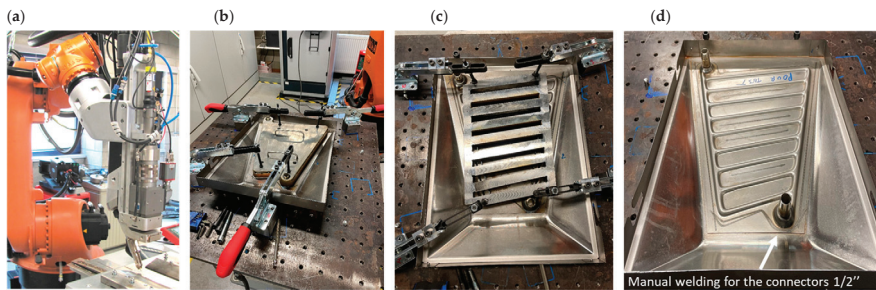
Laser welding setup: (a) laser head mounted on a robot, (b) clamped tool for outer contour, (c) clamped tool for inner channels; (d) TIG welding for fluid connectors.
